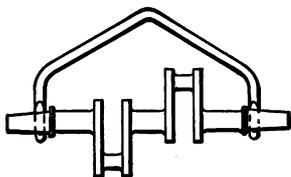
Machine Steel Sling for Lifting Crank-shafts
